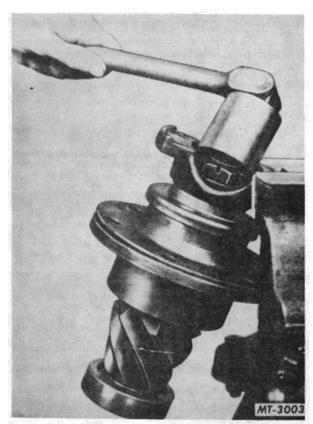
Removal of Pinion Shaft Nut, Washer, and Flange.
